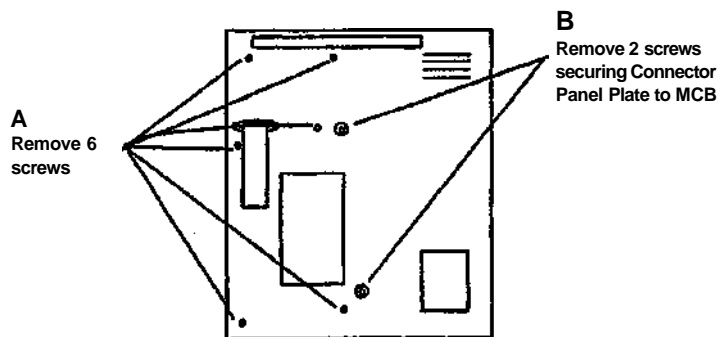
Rear view of 8830 Controller showing screws to be removed from the 8830 Printer Right Lower Cover
